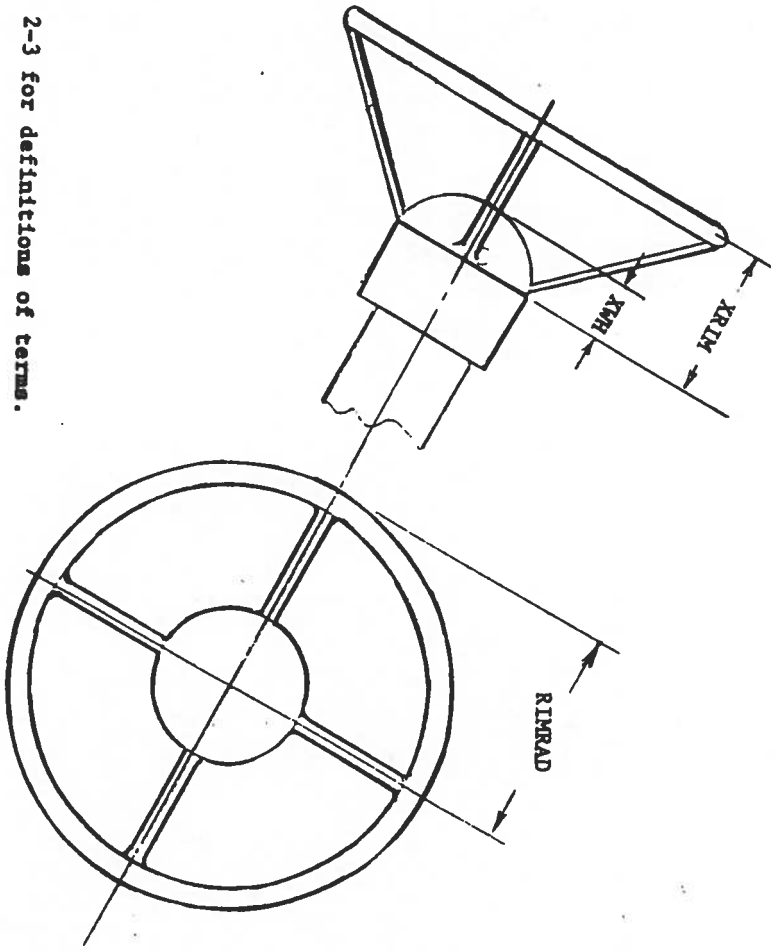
STEERING WHEEL PARAXIAL BOTTOM TEST (TYPICAL)
